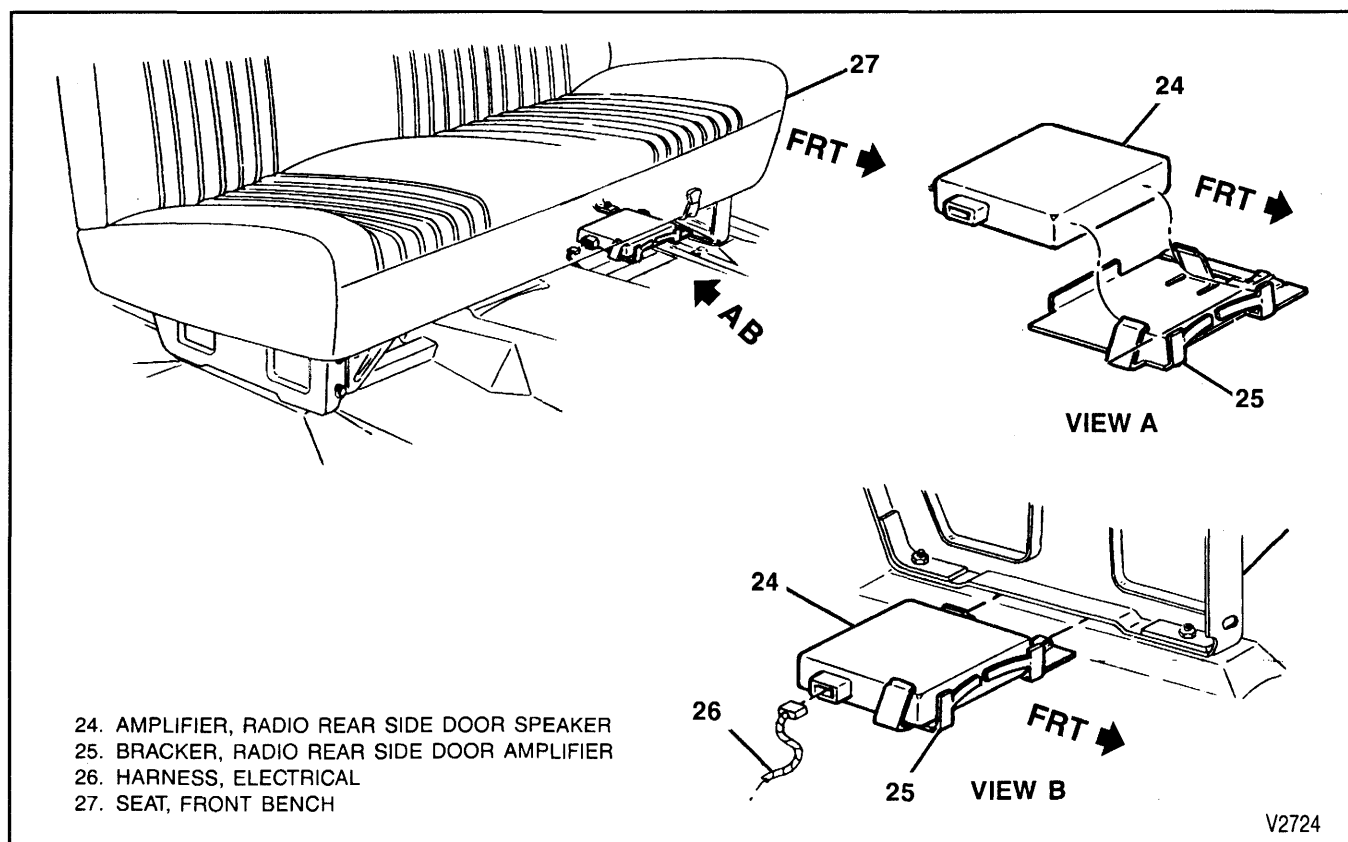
Amplifier Assembly (Front Bench Seat-Suburban Models)
